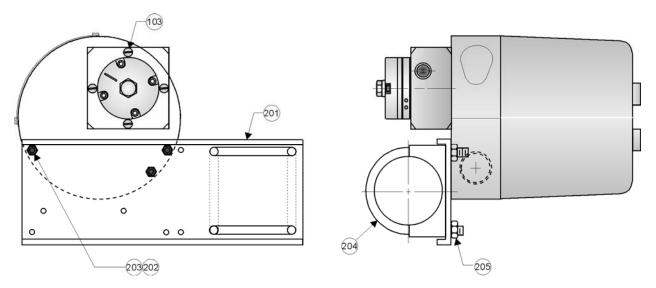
Remote Set Regulator Actuator Unit Mounting Parts
